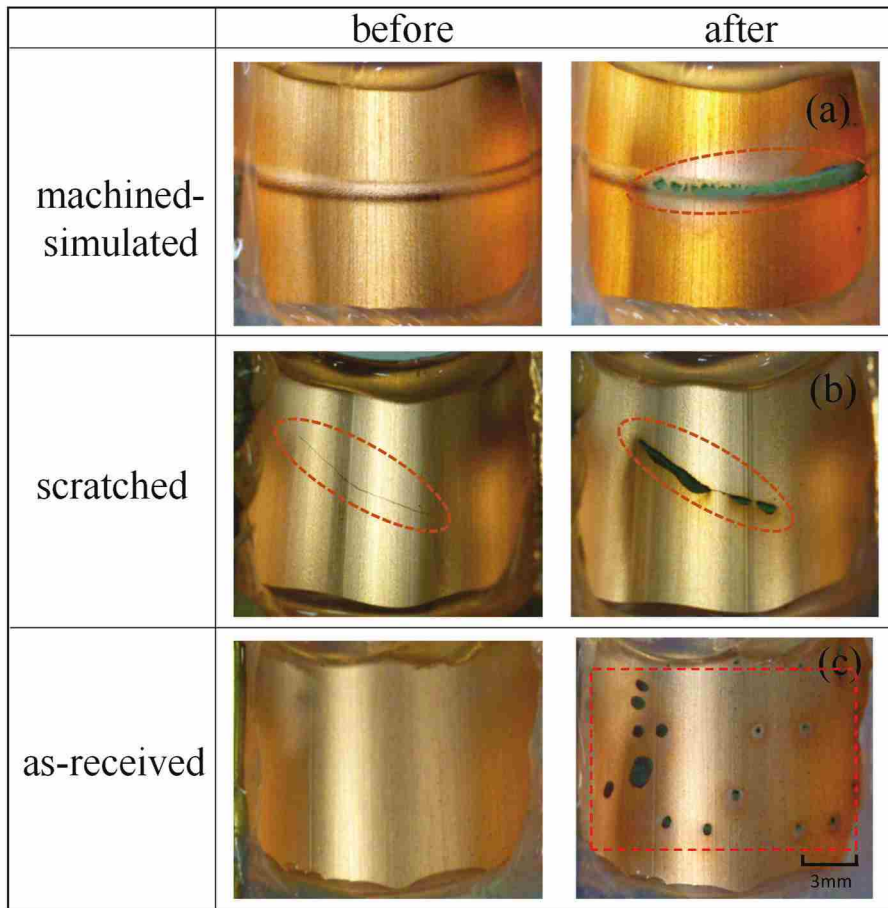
Specimen surfaces of copper tubes before and after one day immersion in test solutions F. (a), (b) machined-simulated, (c), (d) scratched, (e), (f) as-received.
